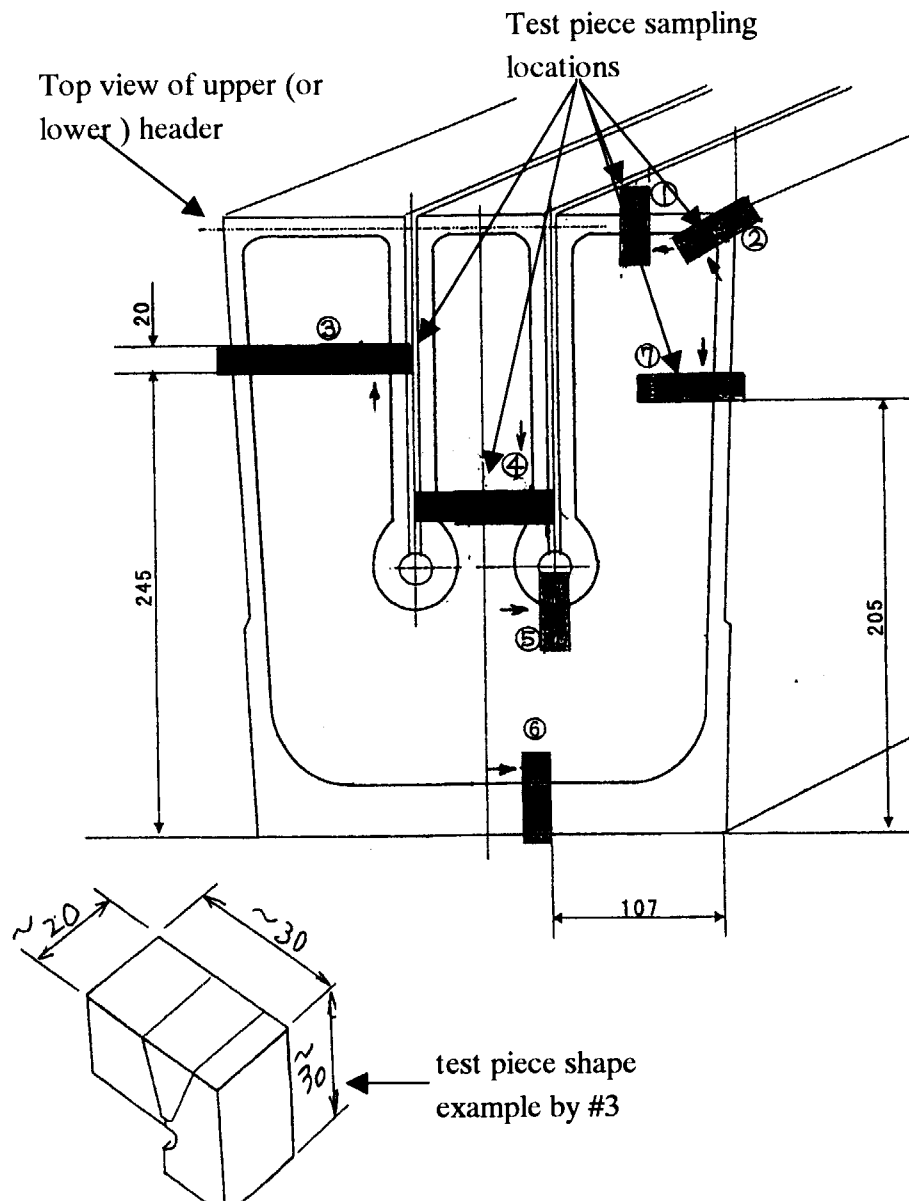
Test piece sampling location for confirmation test of TIG welding of Header cap plate
